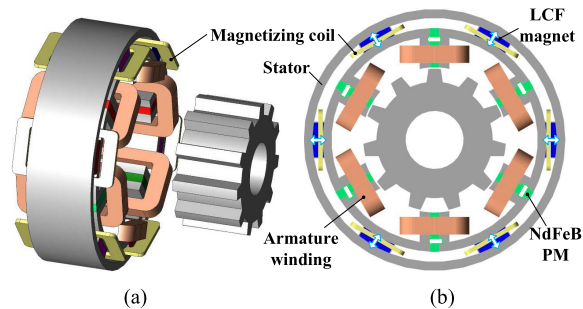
Topology of the investigated SF-HMMM. (a) 3-D exploded view. (b) Cross-sectional view.
